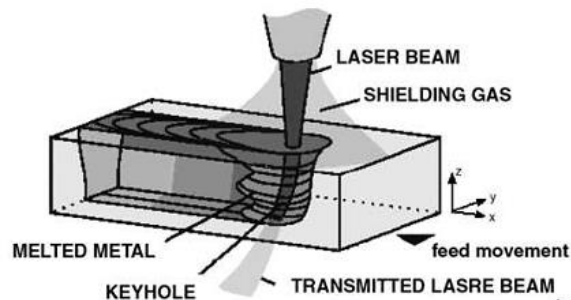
Deep penetration welding process keyhole mode [97]
